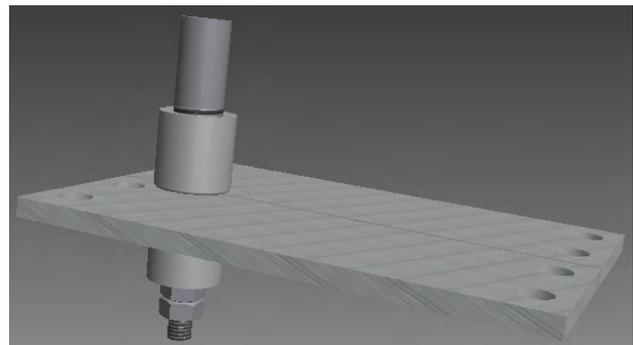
Position of the novel welding tool at the beginning of the FSW
